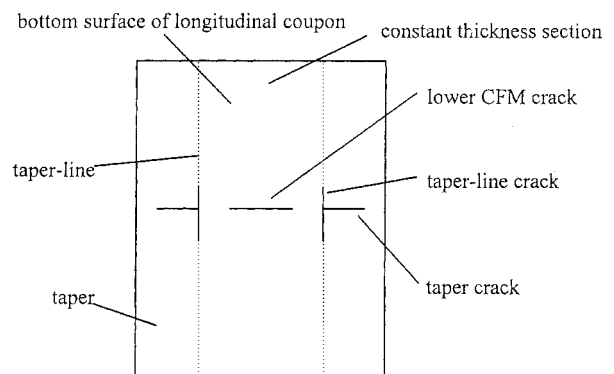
Cracking on the lower surface of the longitudinal coupon.
